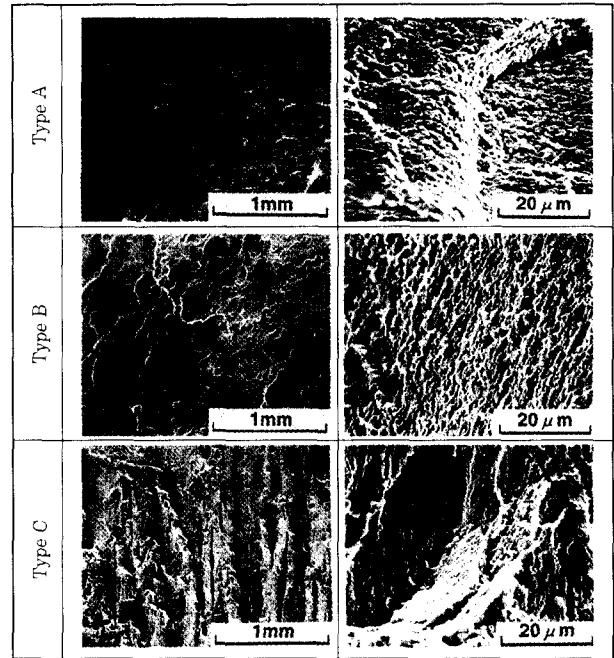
Macro and microstructures of tensile fracture surface of joints
